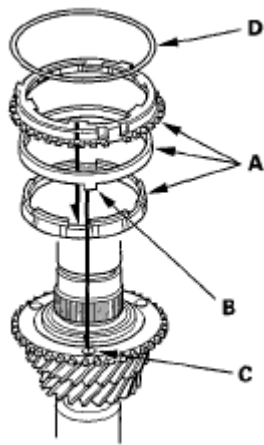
Identifying Double Cone Synchro Assembly, Synchro Cone Fingers, 3rd Gear And Synchro Spring
